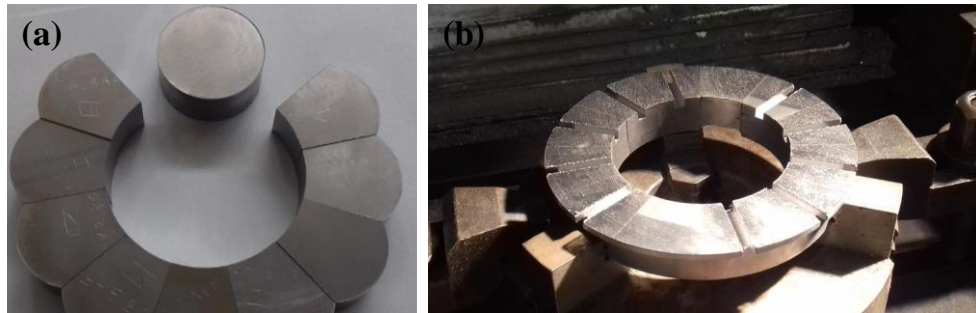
The prototype preparation: from a machined disk (a) to the assembly of modular stator (b)
